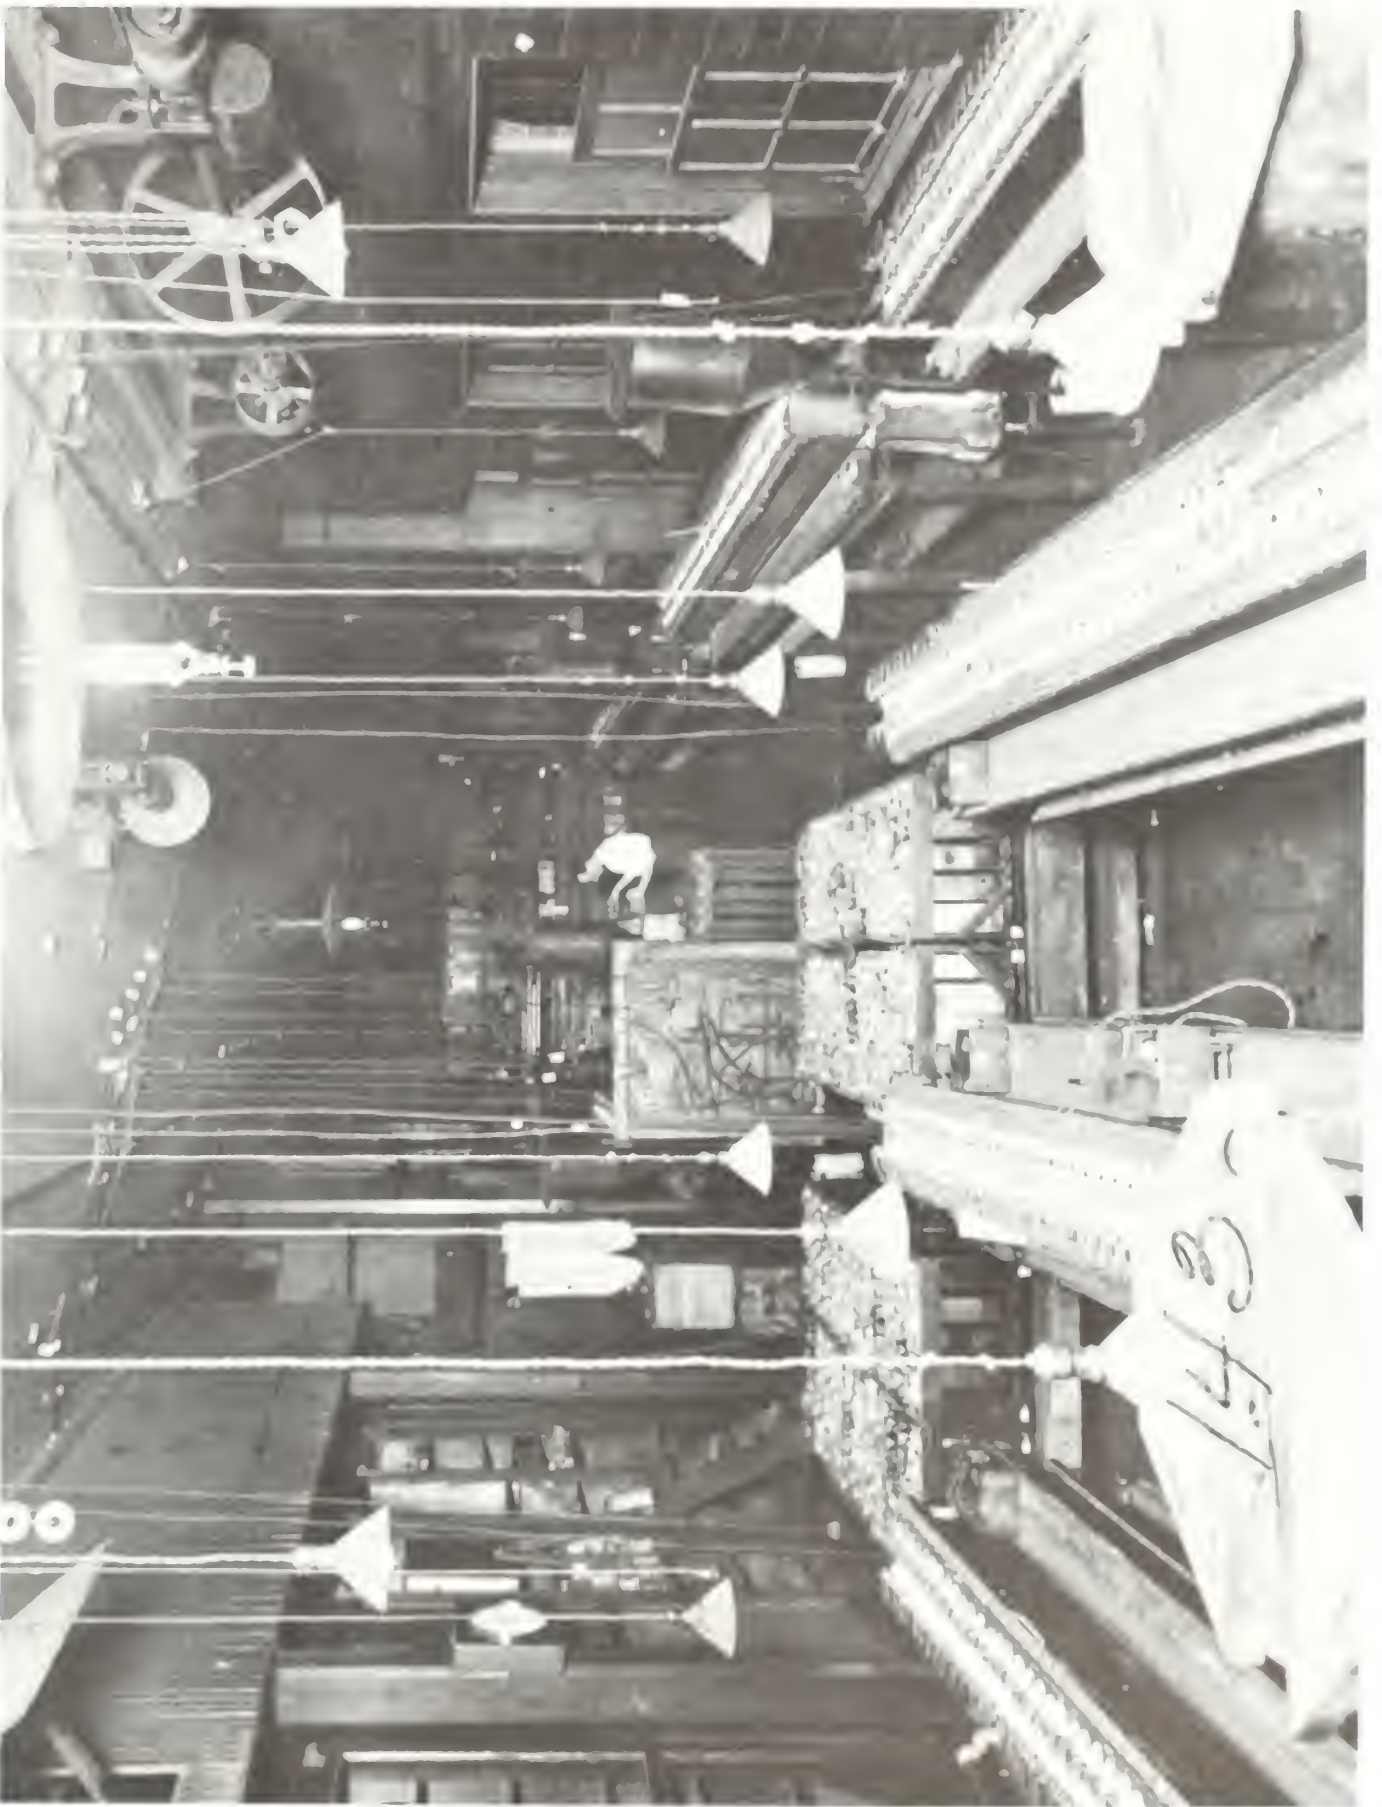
Small cell testing room, third floor, Building 5, north side, looking east, ca.1910.
